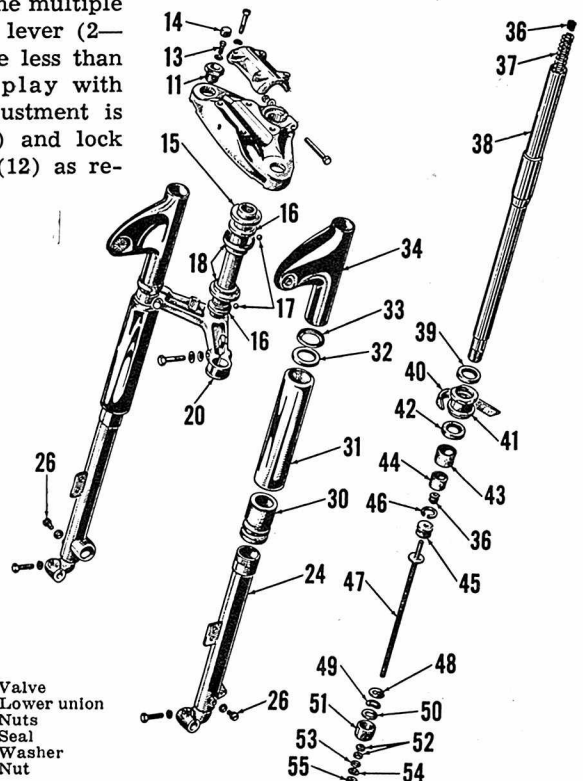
Exploded view of Mo-Ped and Campus 50 front suspension assembly.
